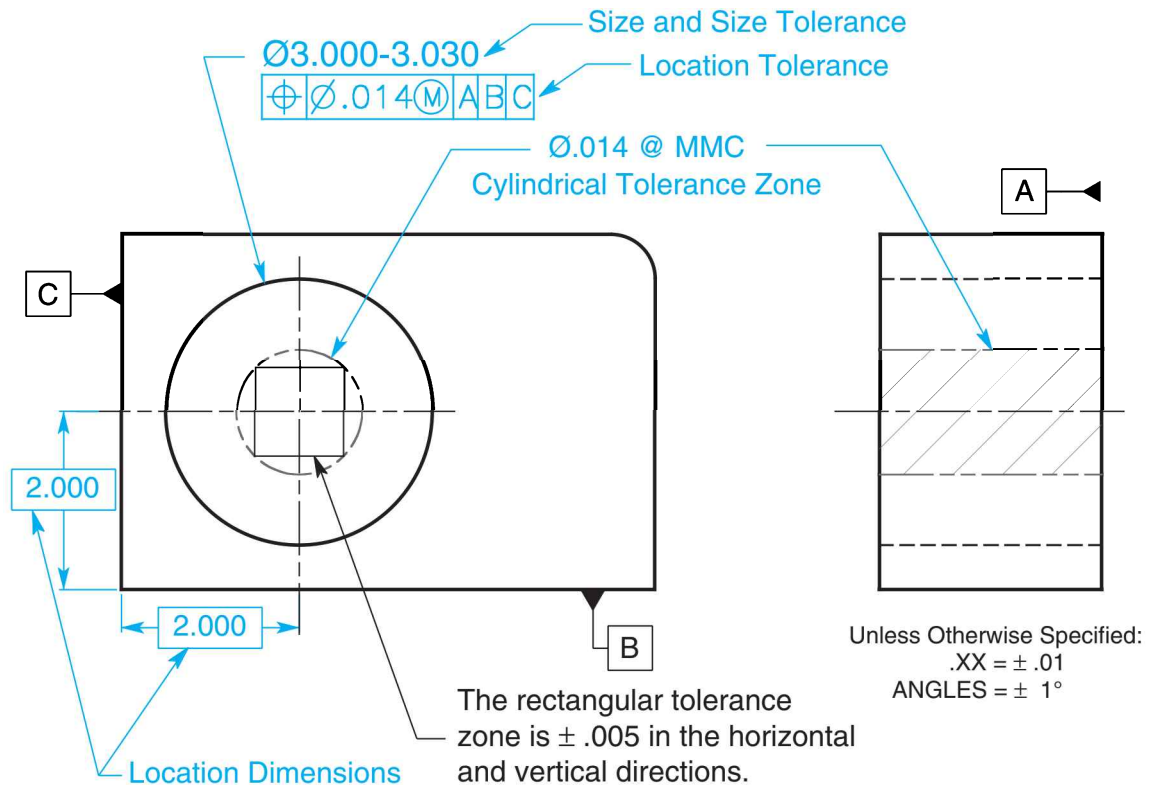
The cylindrical tolerance zone compared with the rectangular tolerance zone.
